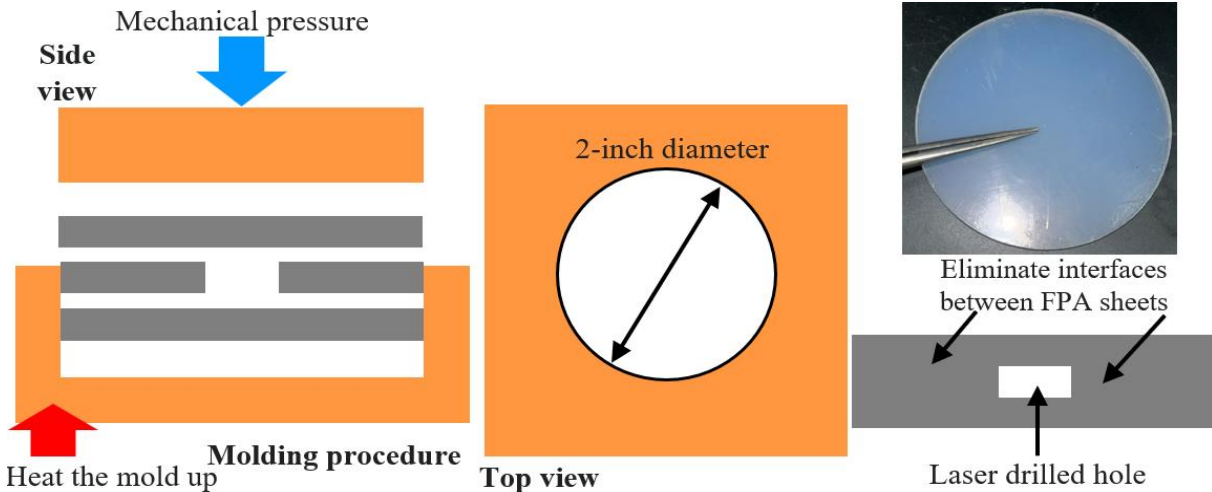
The molding procedure to eliminate the interfaces among the three-layer PFA coupon
